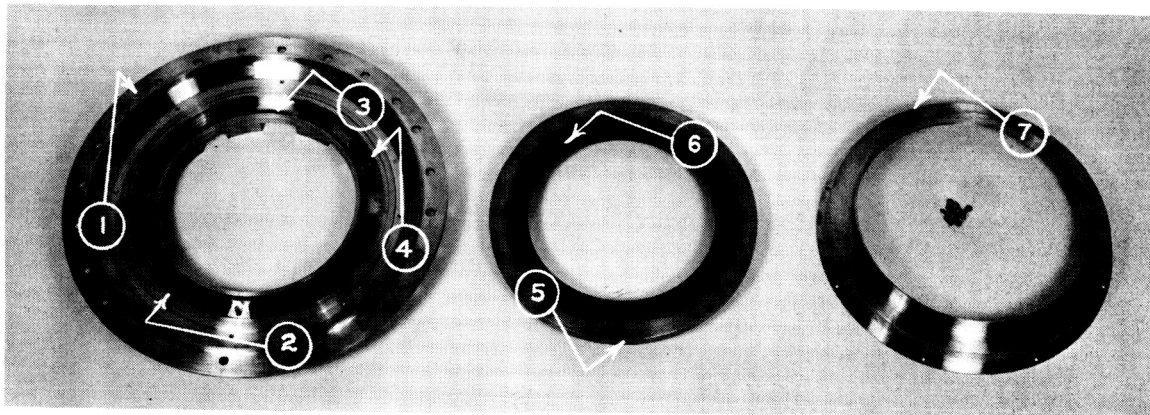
Components of the Orifice-Compensated Hydrostatic Seal 1. Carrier 2. 18 Springs 3. Piston Ring 4. 3 Antirotation Lock Pins 5. Carrier 6. Carbon Seal Ring 7. Assembly Guard (XP-66914)
